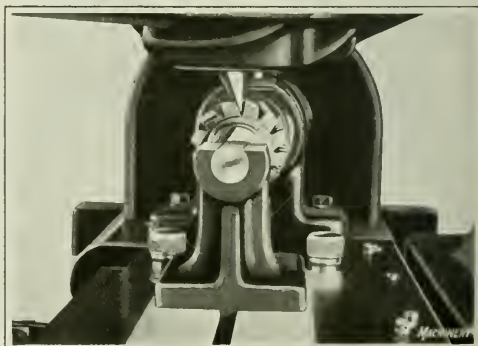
Close-up View of Tailstock showing Setting of Grinding Wheel for sharpening Spiral-gashed Hobs
